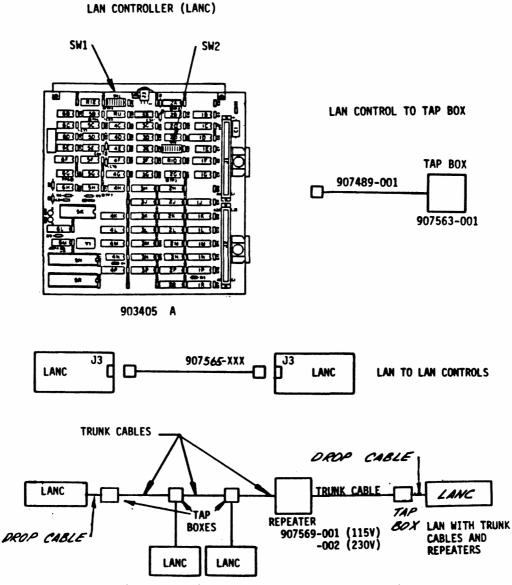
Location of Switches and Cable Information for LANC PCBA
